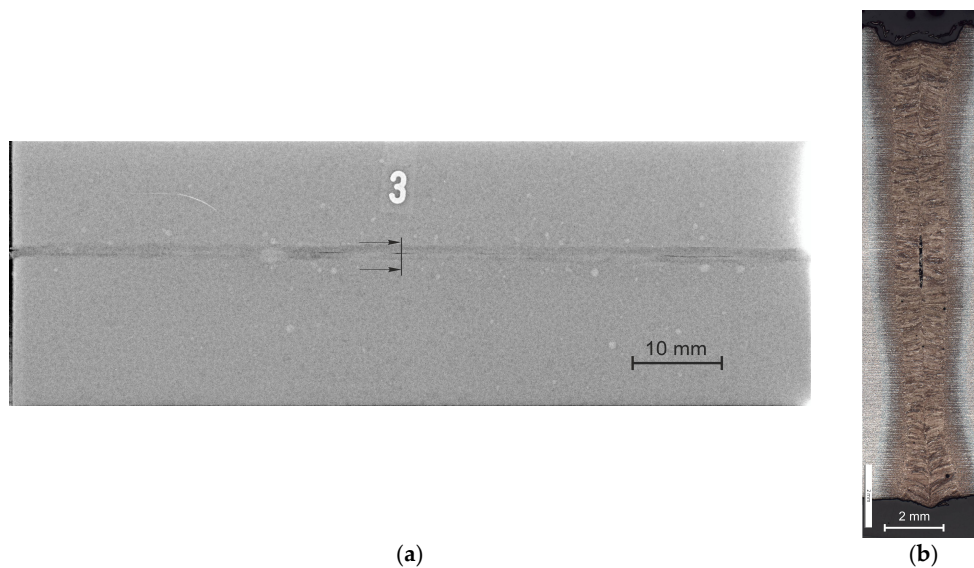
(a) Radiographic film of a welded sample. (b) Weld cross-section at the crack location.
